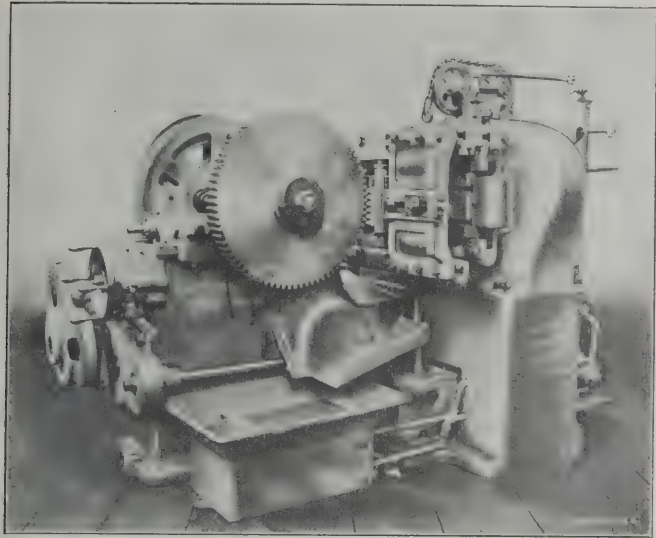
The Sunderland Patent Spur Gear Generating Machine
